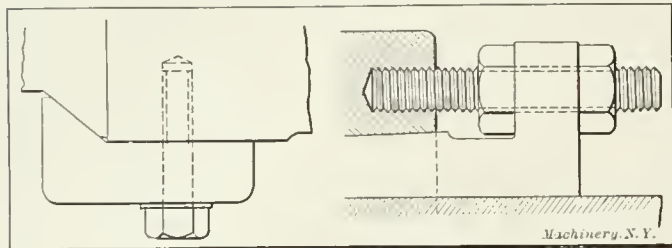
Gib for Shaper Saddle Fig. 31. Usual Method of Adjusting Taper Gibe
